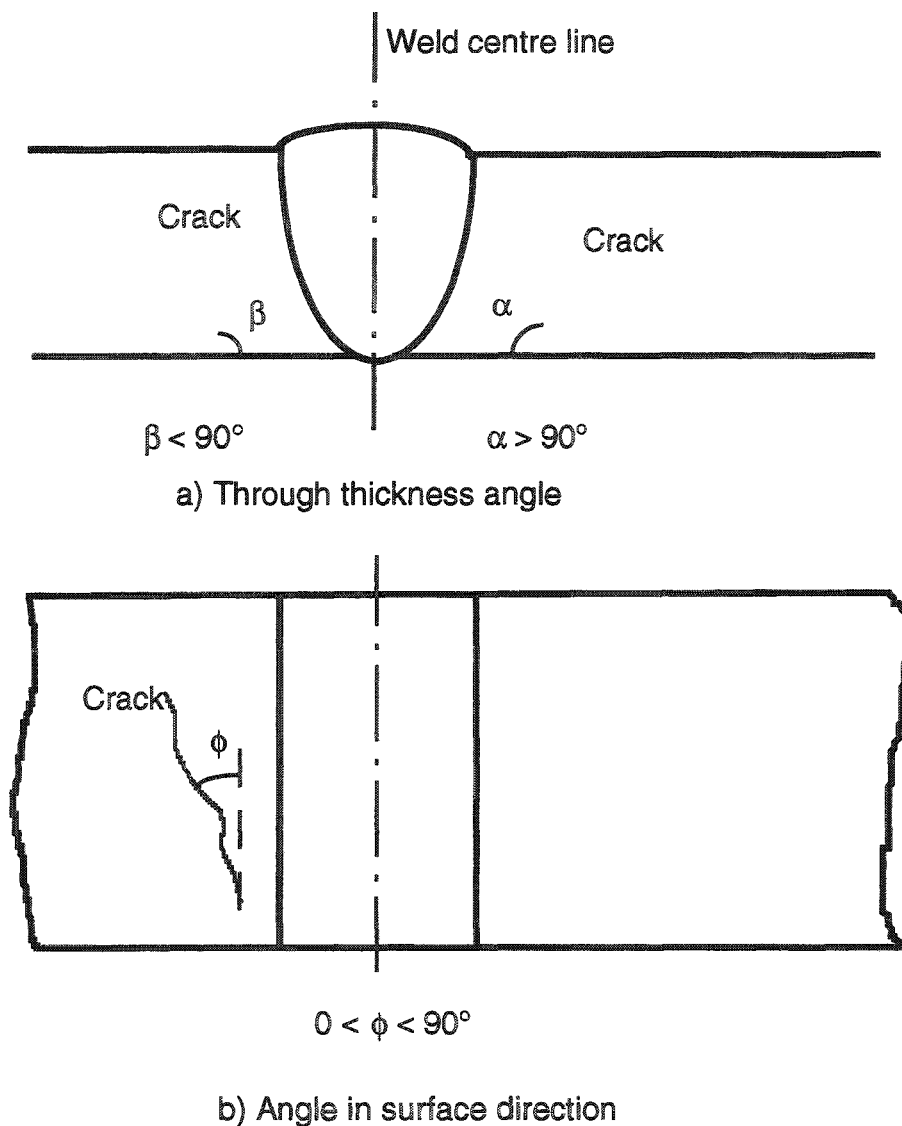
, Definition of angles when the cracks are located close to a weld, a) in through thickness direction and b) in surface direction.
